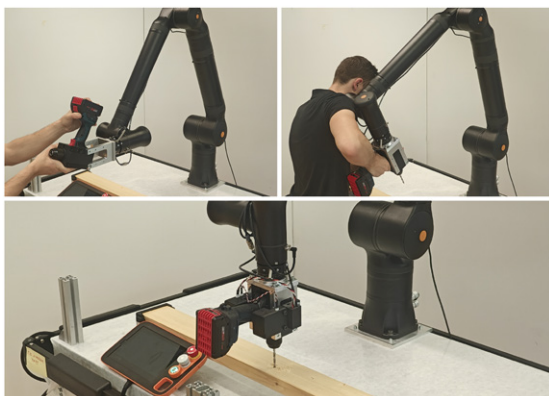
From left to right: Operator mounts a drill driver, teaches how to drill one hole and starts a test scenario.
